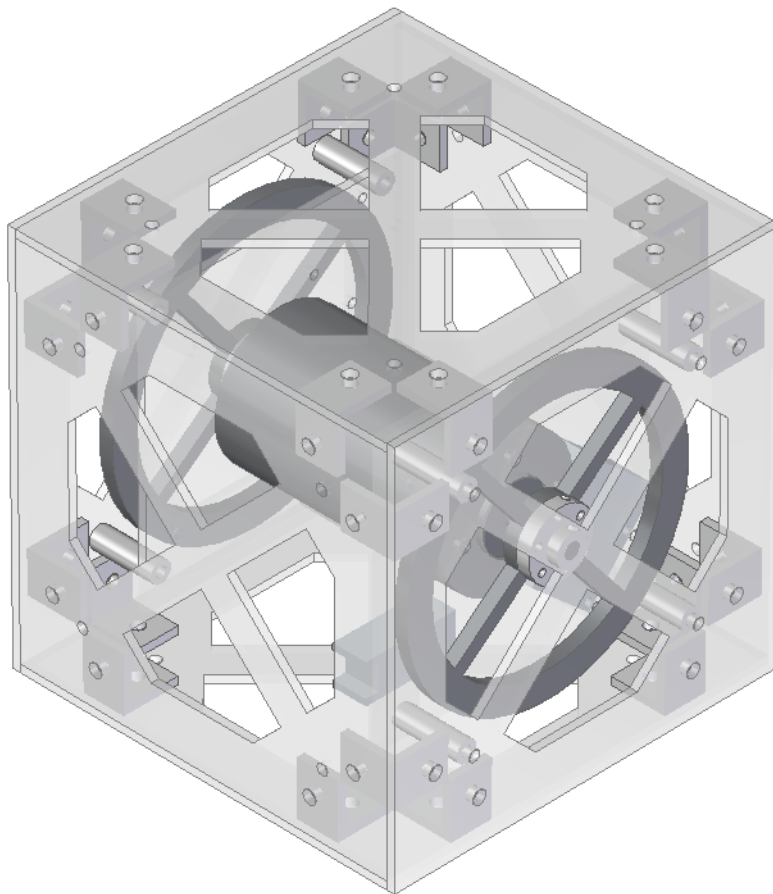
A Solid Edge CAD that shows the cube shell with reaction wheels and motor installed. Made in Solid Edge
